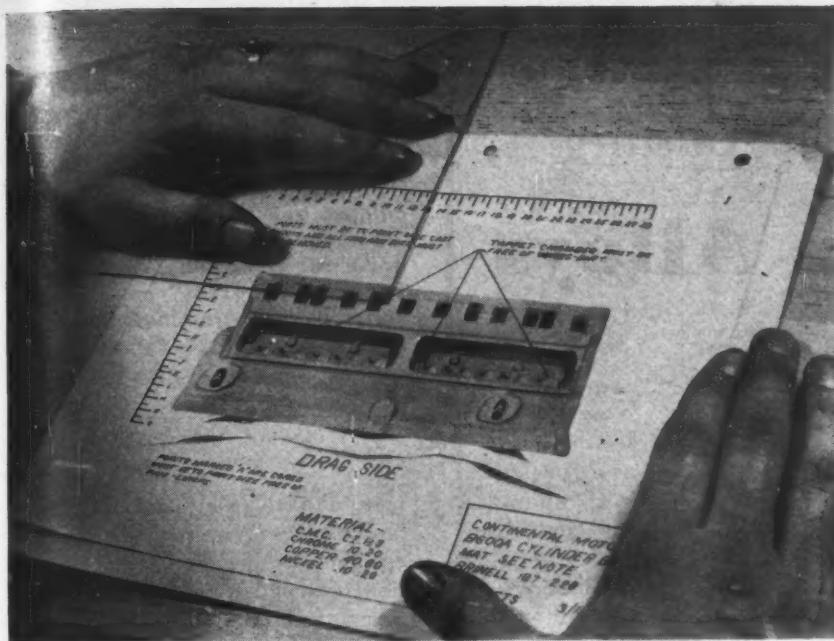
Locating exact position of defect shown in Fig. 4 on photo position finding sheet before reporting location to the foundry. Position as noted is D-13.
